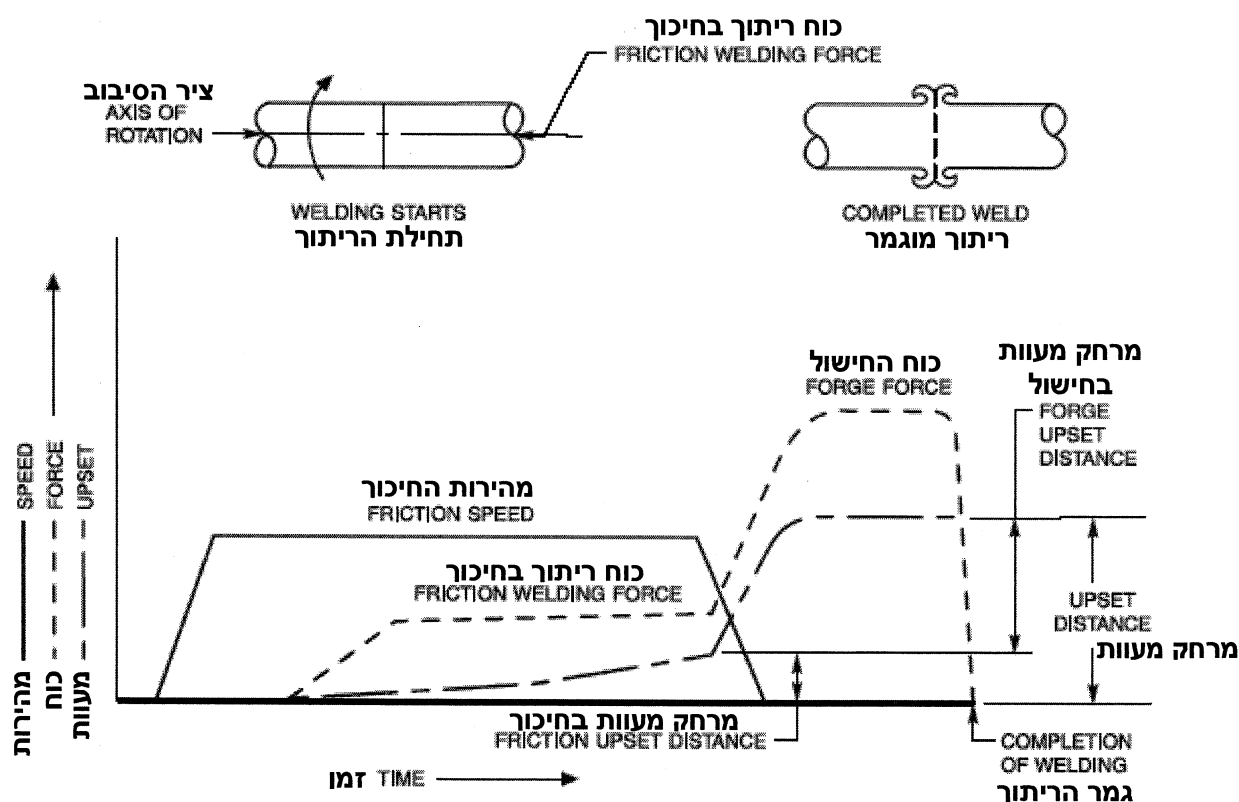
Generalized Diagram of Direct Drive Friction Welding
